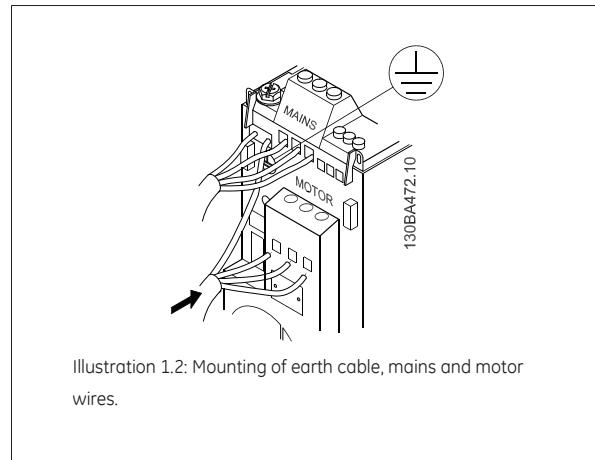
Mounting of earth cable, mains and motor wires.
